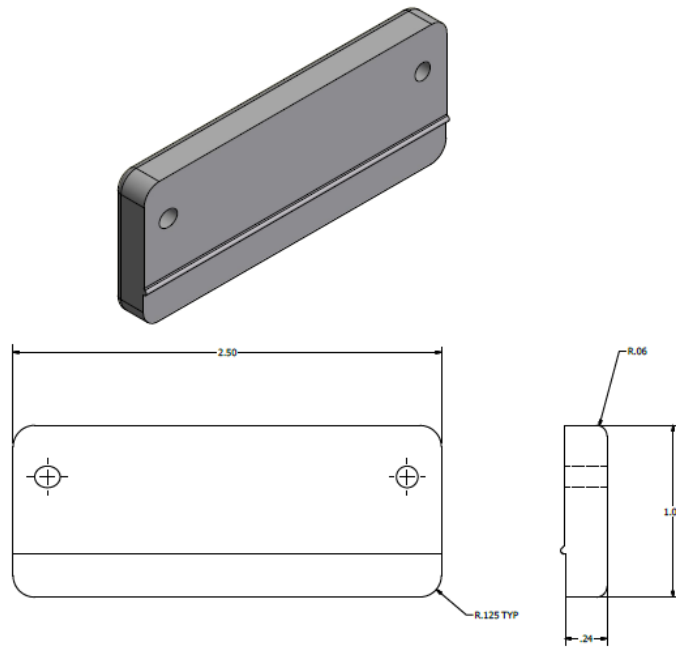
Rendering and Schematic of the Positive LCP Forming Mold
